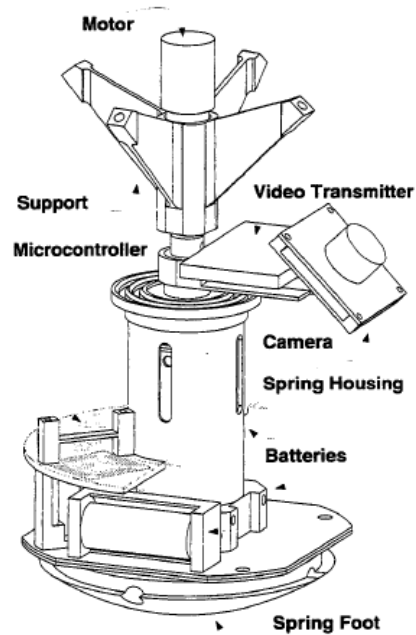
Scout robot similar to that shown in [9] where the spring foot is located to the rear [11].
